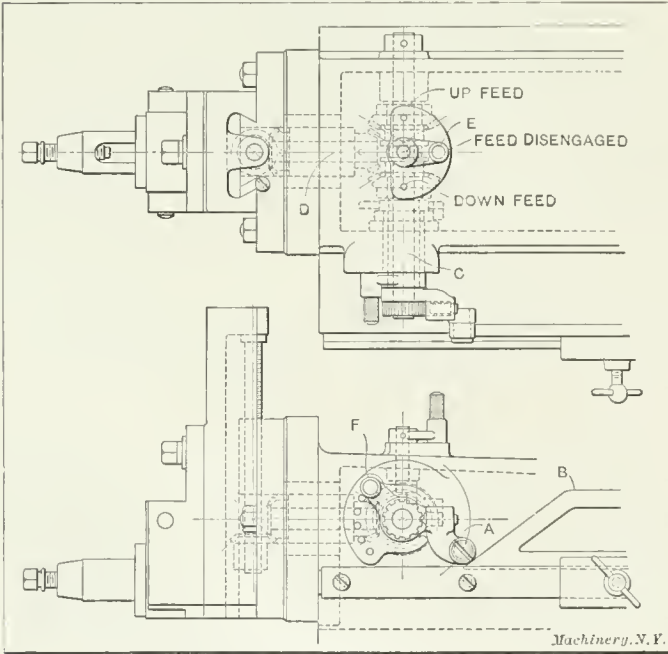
Elevation and Plan of Vertical Feed Mechanism for Rockford Shaper
